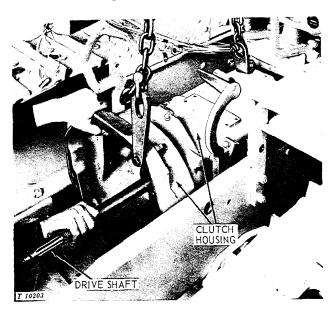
Removing Input Shaft (Tractors Without Direction Reverser)
